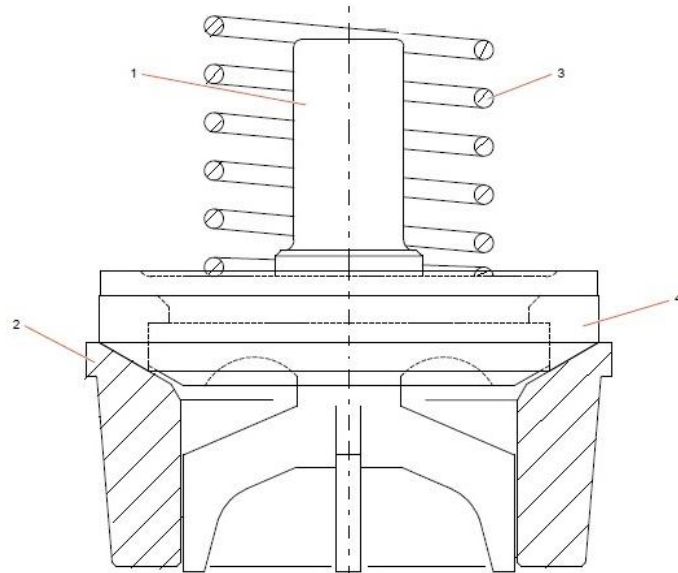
Mud pump valve: 1. Valve body; 2. Valve seat; 3. Valve spring; 4. Valve insert.
